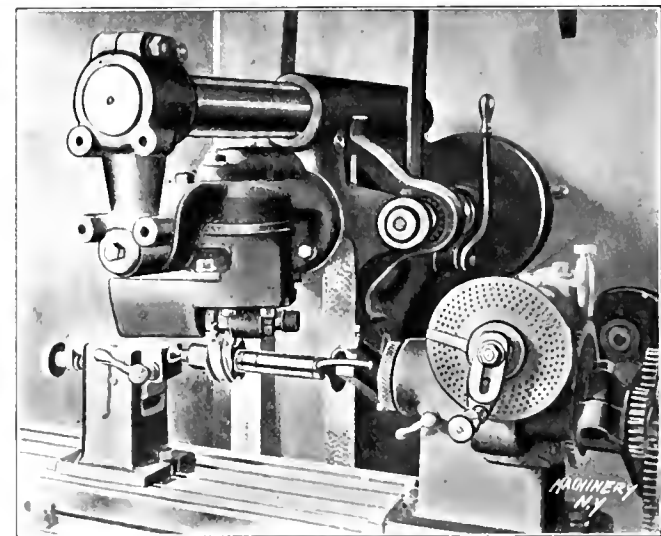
Cutting a Spiral of Short Lead on the Plain Milling Machine, an Operation Impossible on the Universal Machine without Special Attachments.
